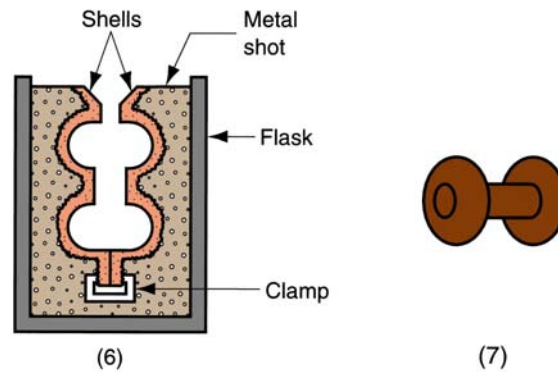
Steps in shell-molding: (6) two halves of the shell mold are assembled, supported by sand or metal shot in a box, and pouring is accomplished; (7) the finished casting with sprue removed.
